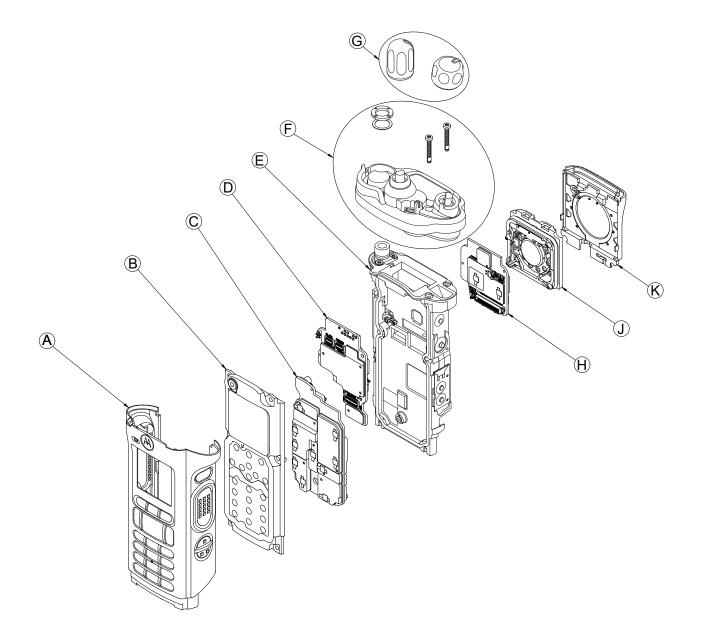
APX 6000XE Dual Display Partial Exploded View
